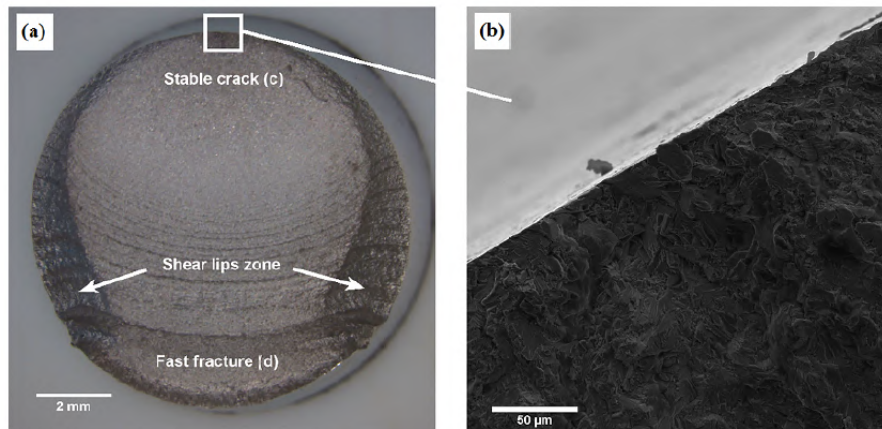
Inconel 625 fracture surface, showing the three main stages of fatigue: Nucleation of cracks in the upper region of the specimen, followed by crack propagation and “beachmarks” formation, ending with fast, sudden fracture of the specimen [58].
